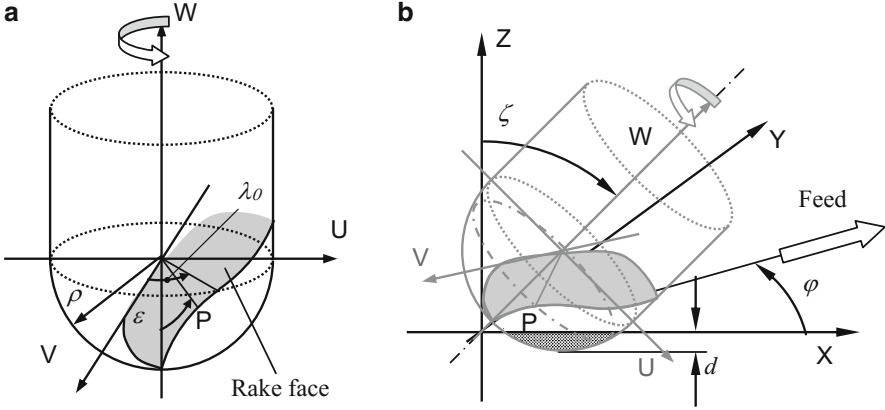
Mechanistic model in micro dimple milling: (a) tool model; (b) removal model
